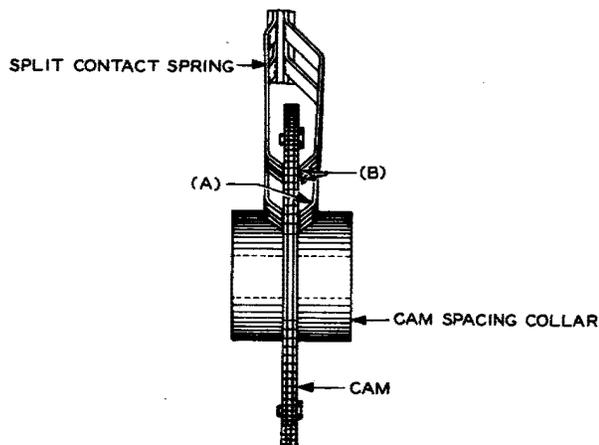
Contact Spring Pressure Requirements With the Prongs of One Spring Out of Adjustment
